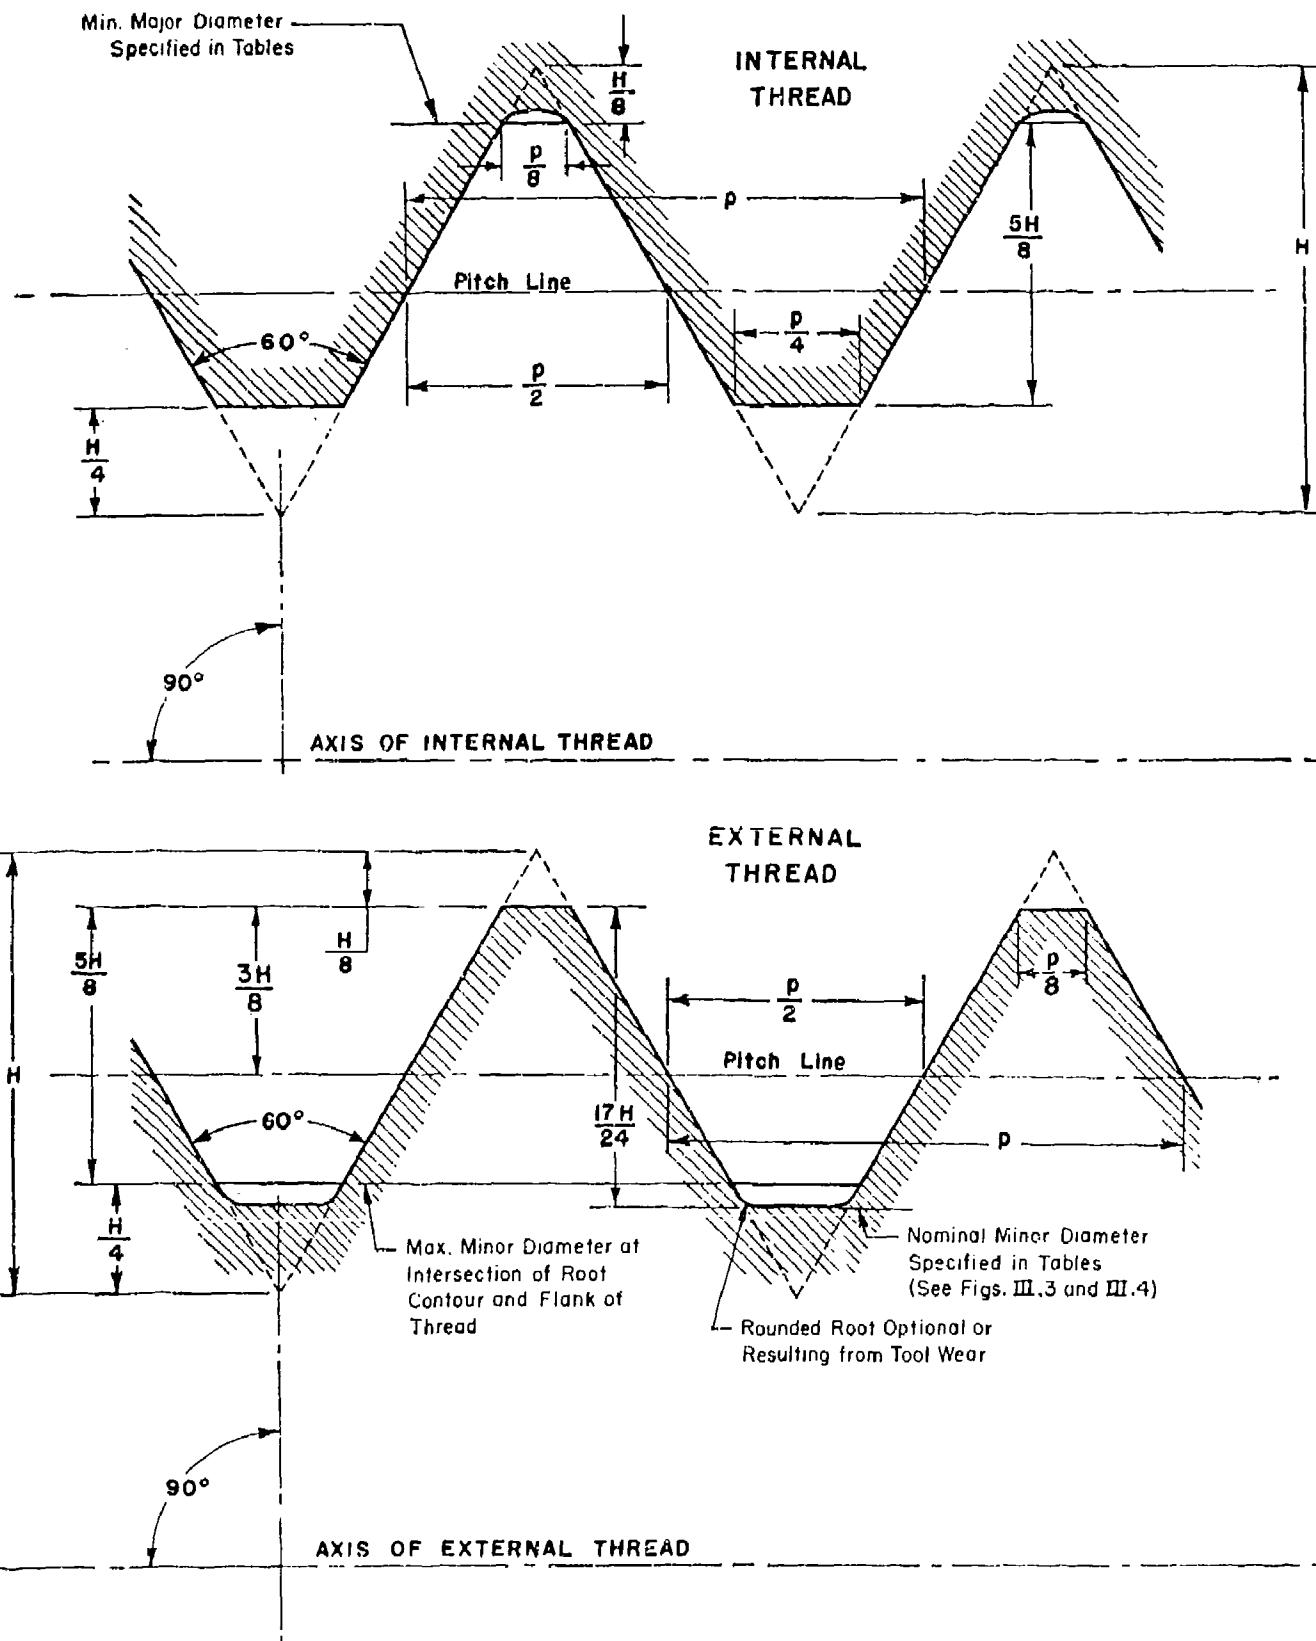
Unified internal and external screw thread design forms (maximum material condition).
